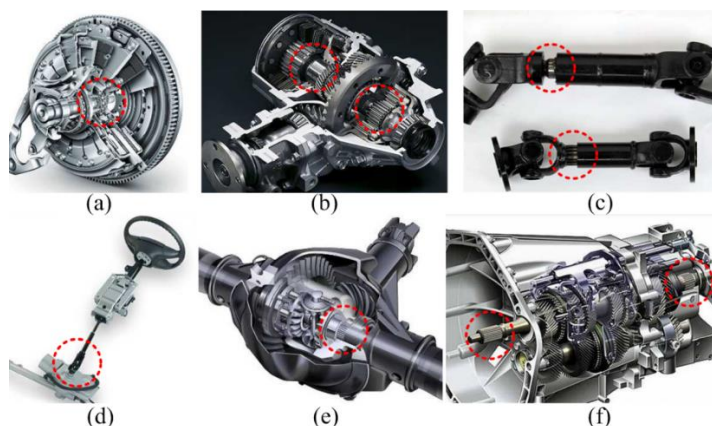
Installation positions of the spline shaft in automobile: (a) Clutch; (b) Driving axle; (c) Transmission assembly; (d) Steering assembly; (e) Differential; (f) Transmission
